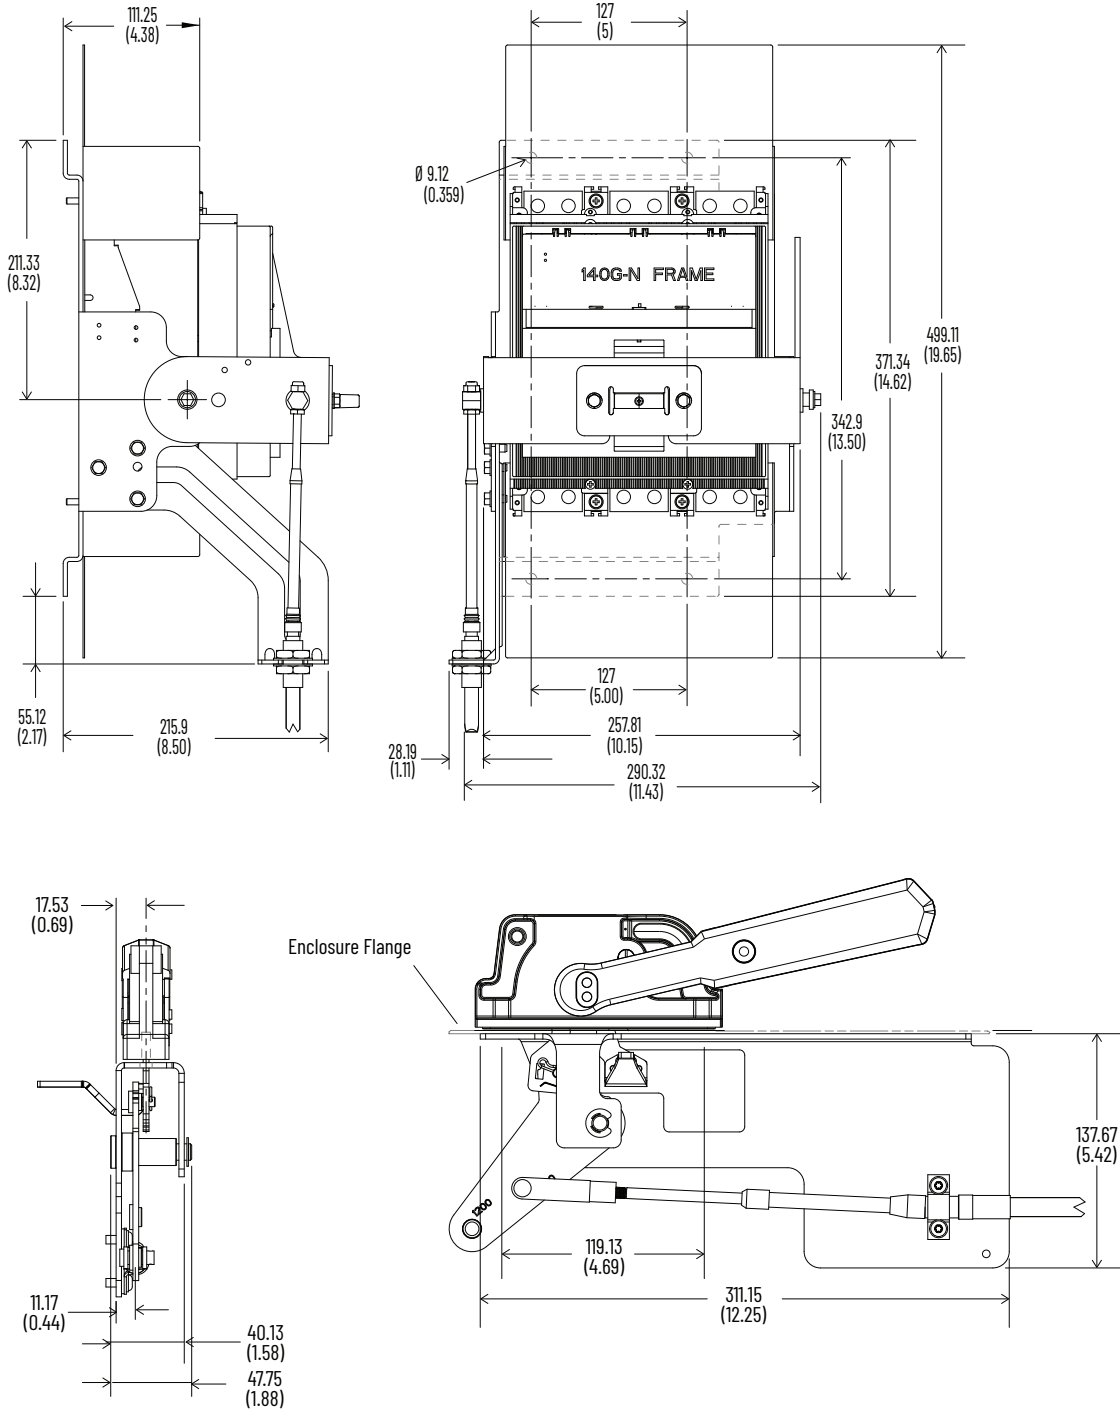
Frame Size N Flex Cable Operator and Actuator, Left Hand (requires 140G-BML, sold separately)
